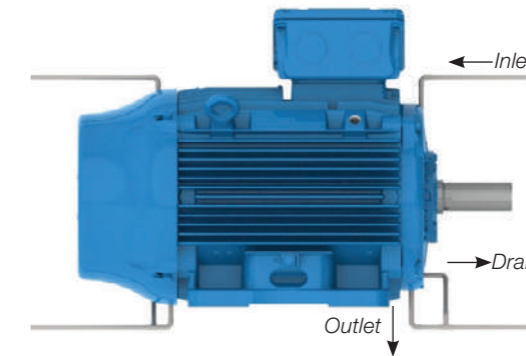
Oil supply and drain system of oil lubricated or oil mist lubricated motors
